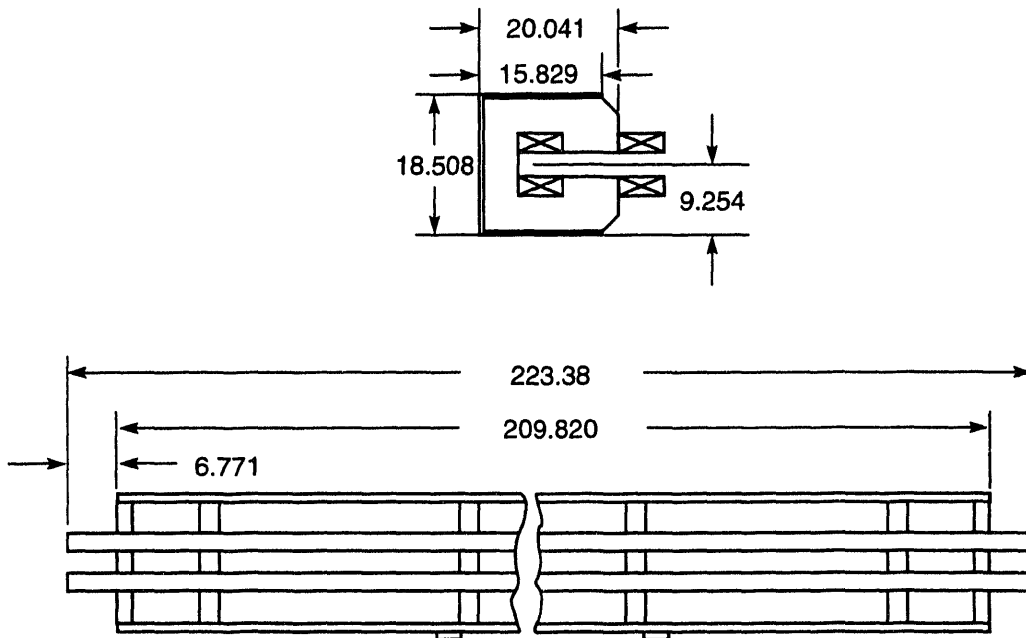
End and side views of the HER bending magnet. Dimensions are given in inches.
